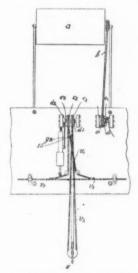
Plan showing elevating rudder and its connections above and vertical rudder and its connections below
